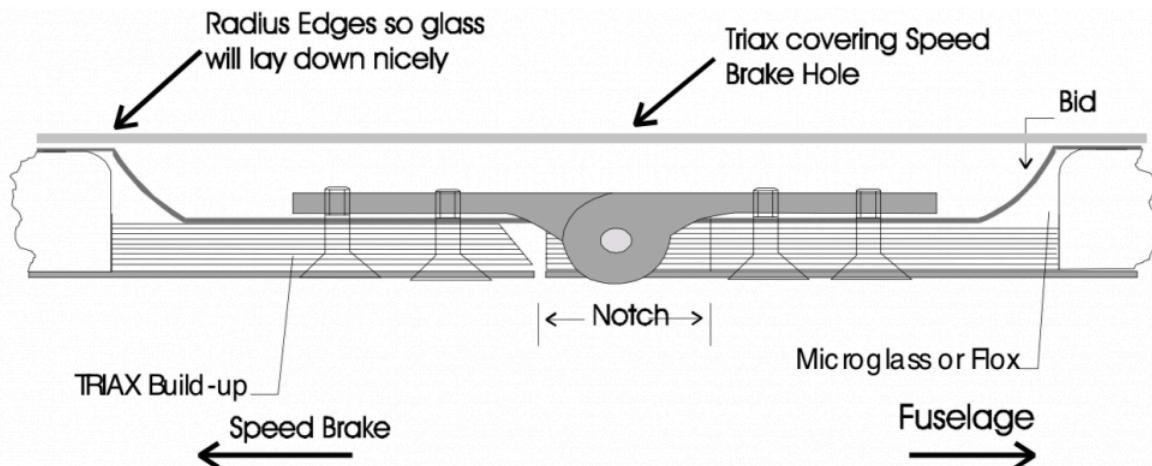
Speed Brake Installation Cross-Section (section A-A)
